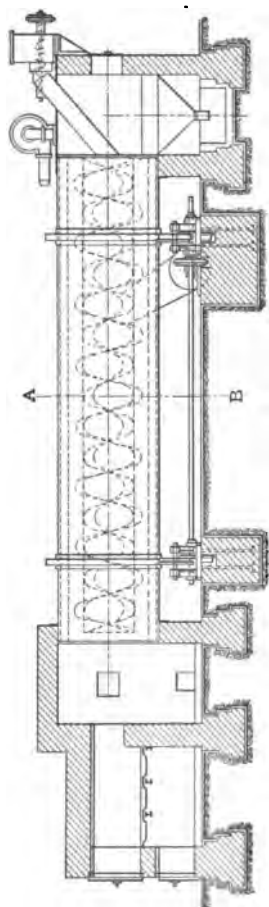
SECTION OF ALSING IMPROVED DRIER.
